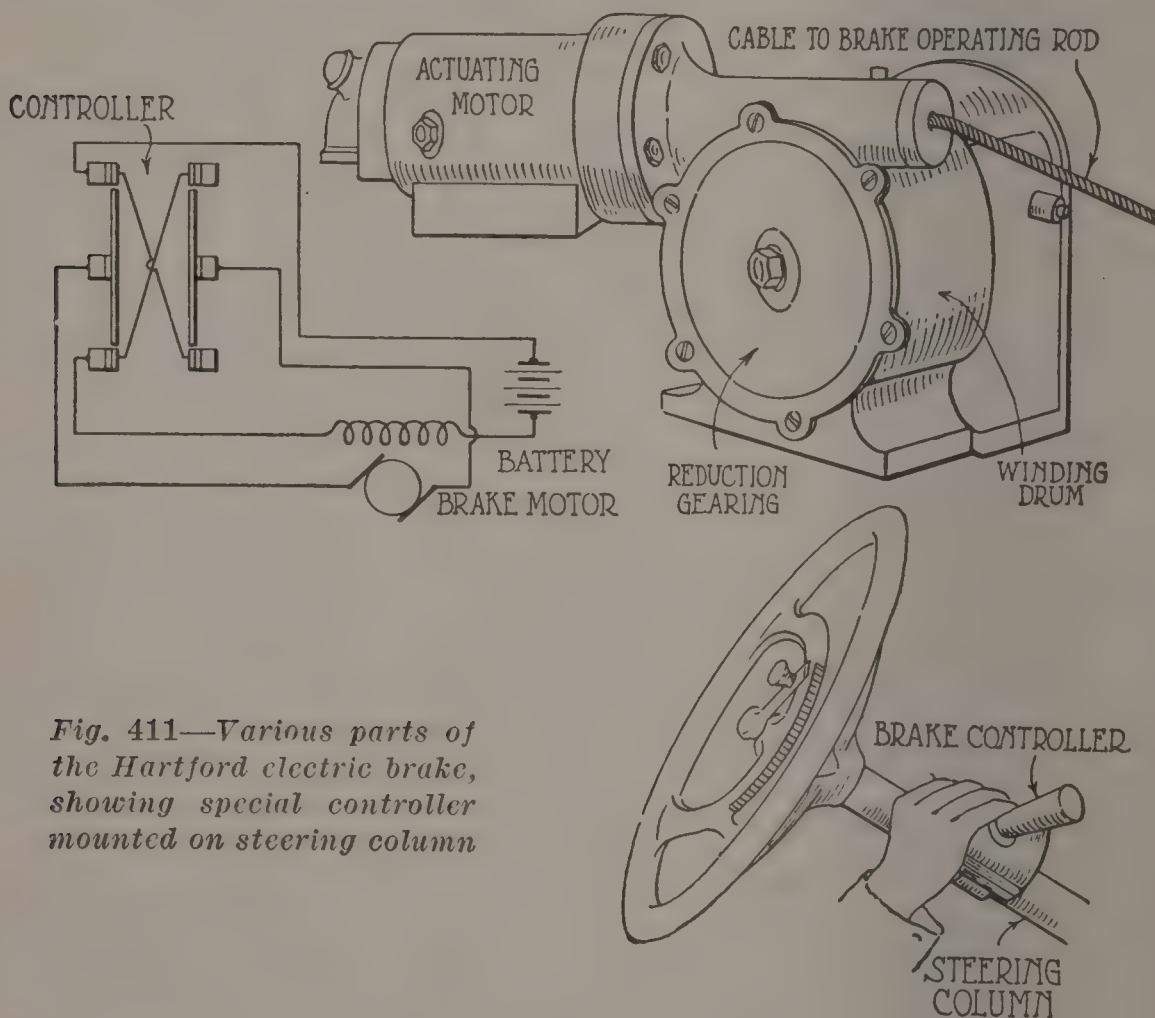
Various parts of the Hartford electric brake, showing special controller mounted on steering column
